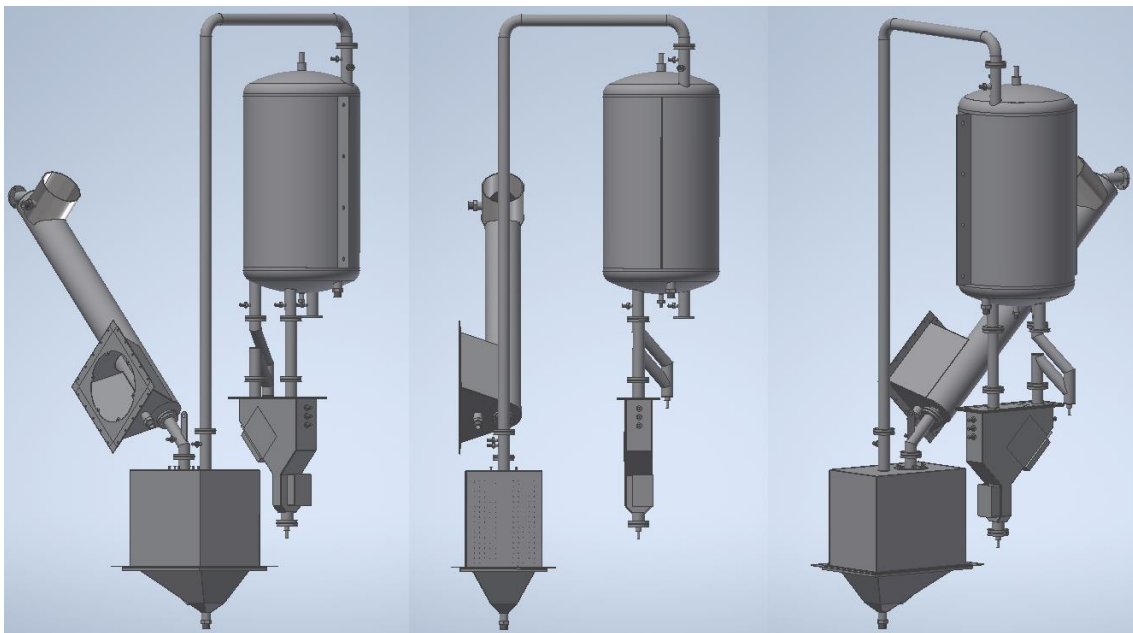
Latest CAD drawings of the Oresol downstream section, with new air cooled Cooler-1 and enlarged Filter F3 (for details see chapter 7.1).
